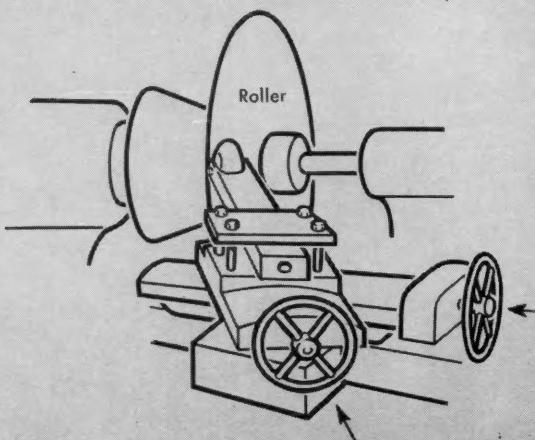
Arrangement using roller type spinning tool mounted on lathe for spinning large parts.
